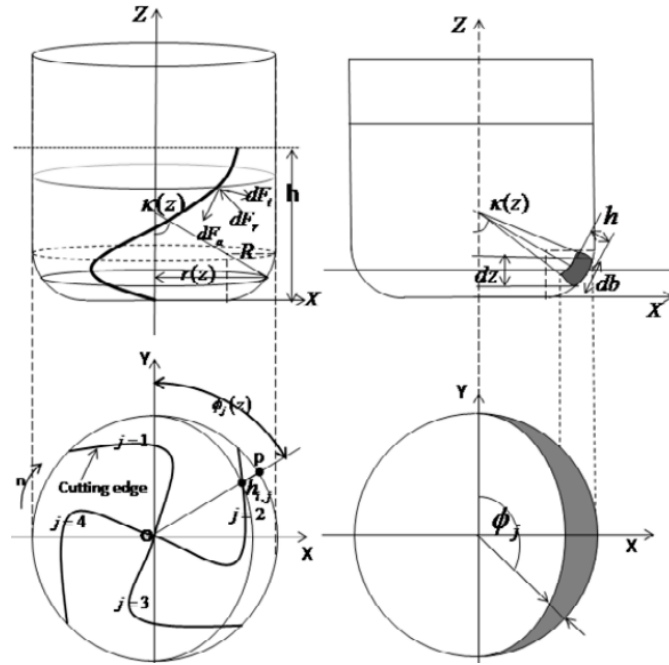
Immersion angle, cutting force components, cutting width and chip load at point P in bull nose end mill (Gao et al., 2013).
